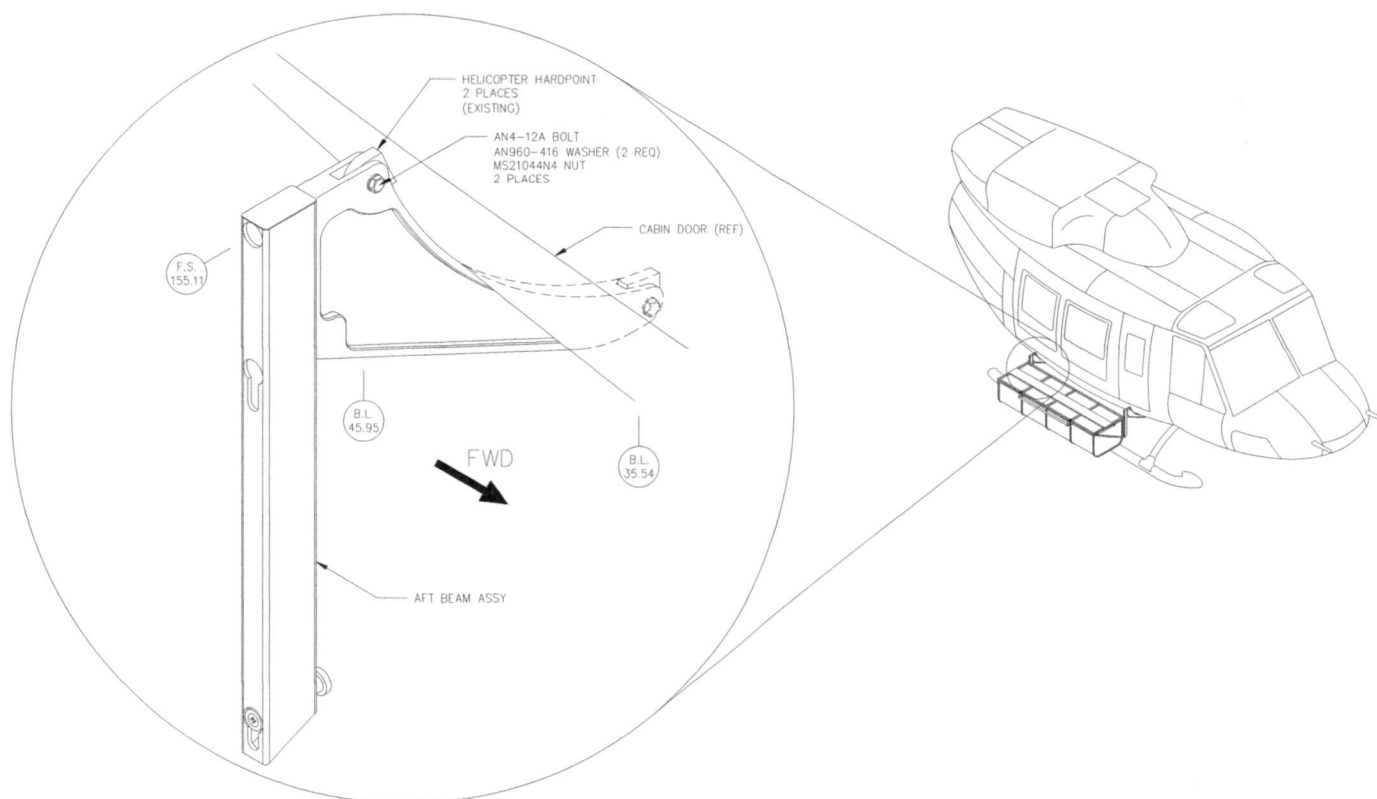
Attachment Provisions Installation (75102 Configuration)
